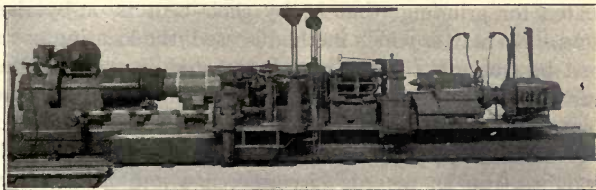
Norton grinding machine for finishing large steel-mill rolls.
